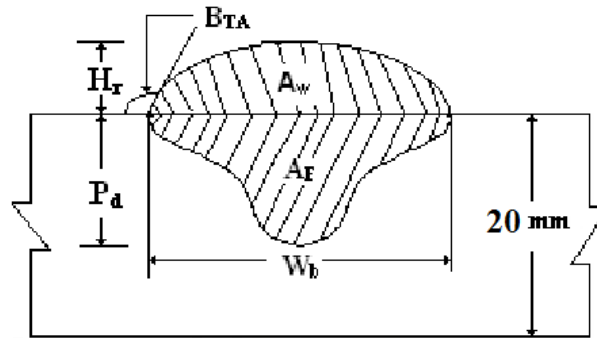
Schematic diagram showing geometrical aspects of weld bead.
